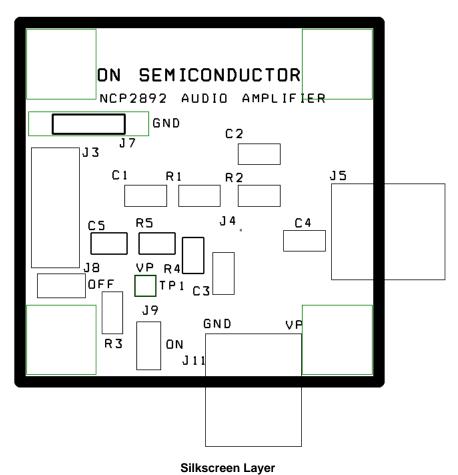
Demonstration Board for 9-Pin Flip-Chip CSP Device - PCB Layers
